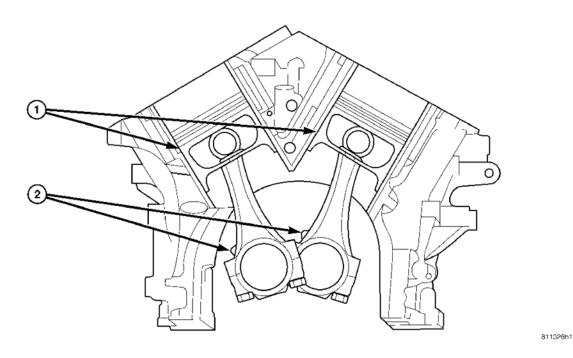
Piston & Connecting Rod Positioning Courtesy of CHRYSLER LLC
